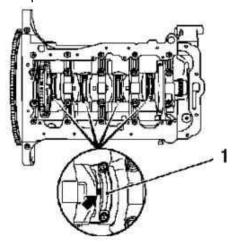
The order covers the installation types of bearings: 1 - connecting rod bearing caps
